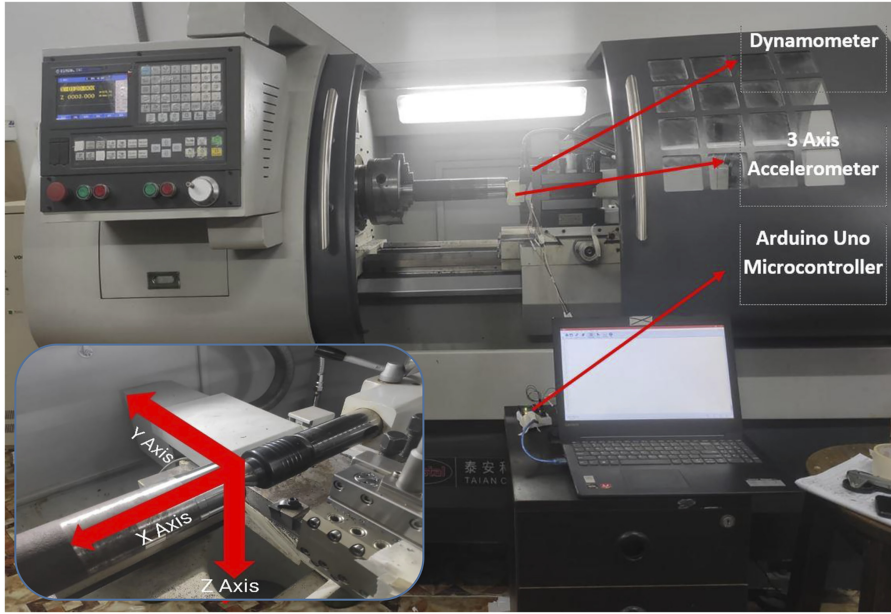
Experimental setup showing accelerometer and dynamometer attachment on CNC lathe machine
